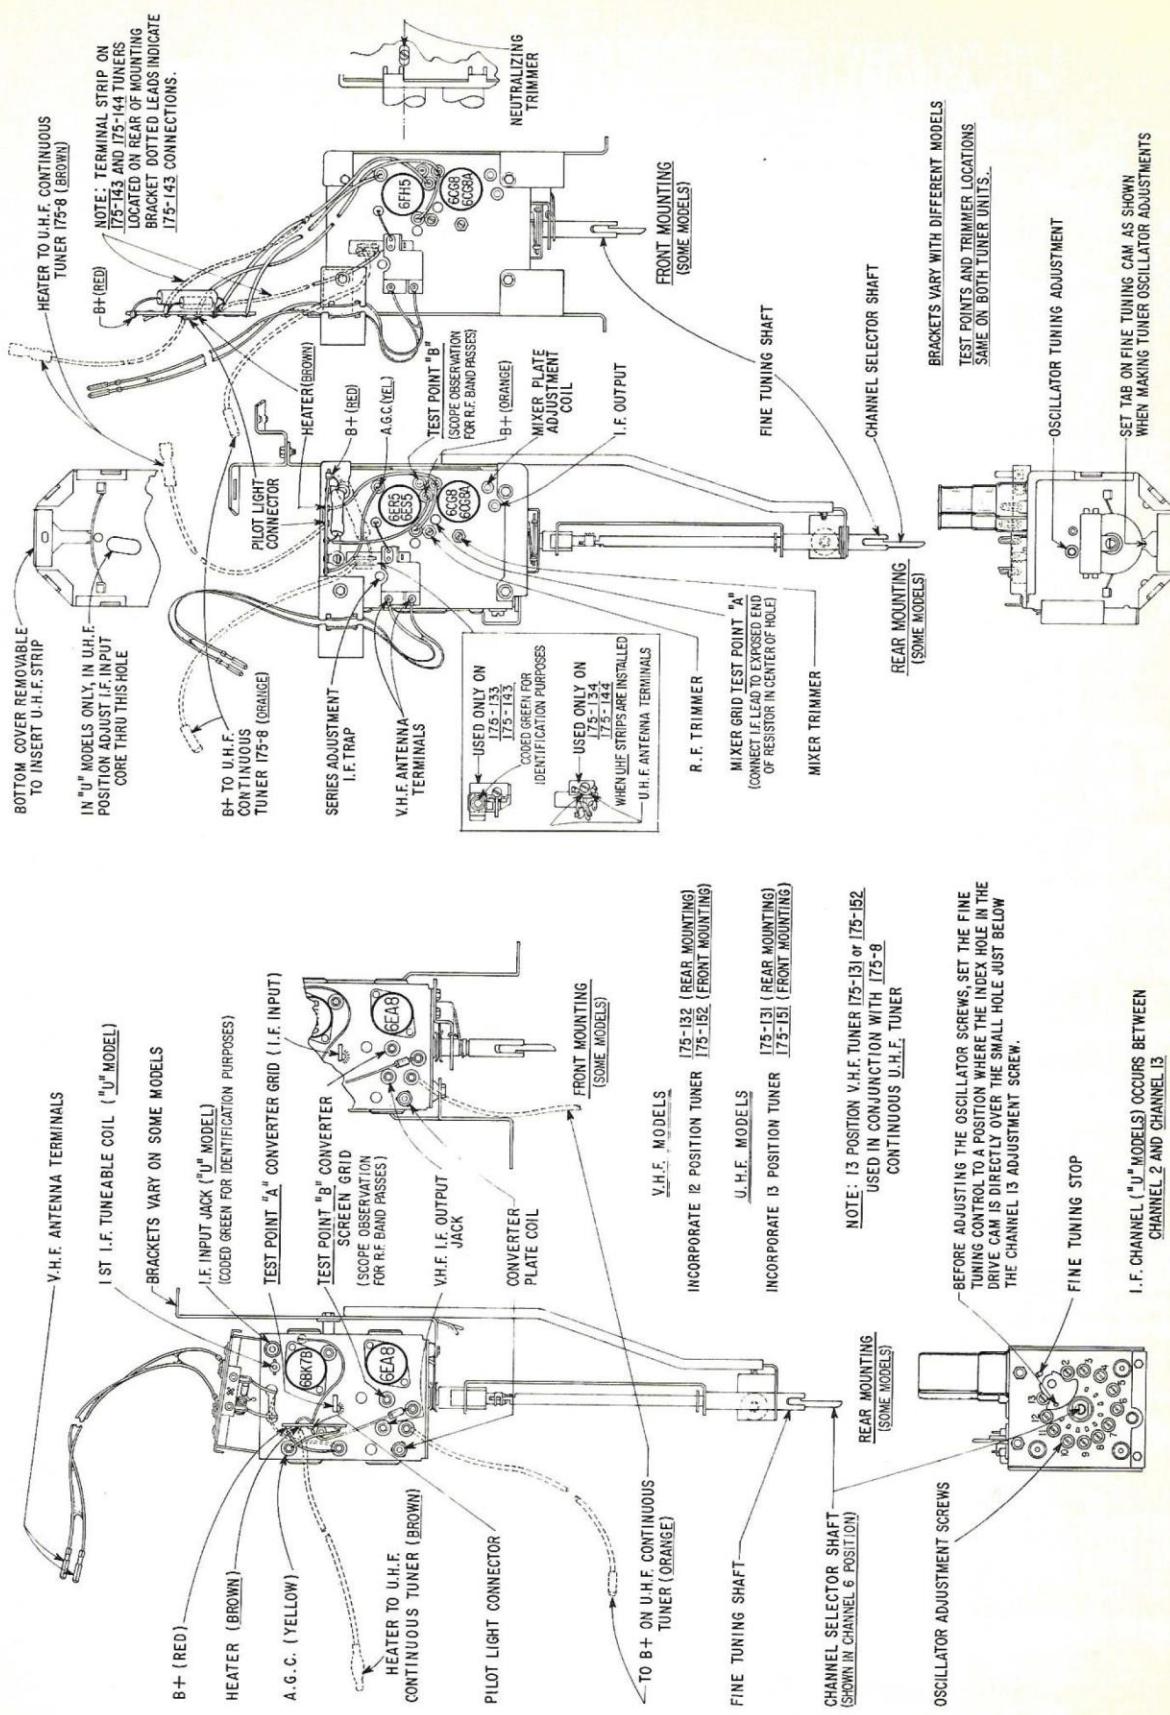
Tube and Trimmer Layout, Bandswitch Tuner
